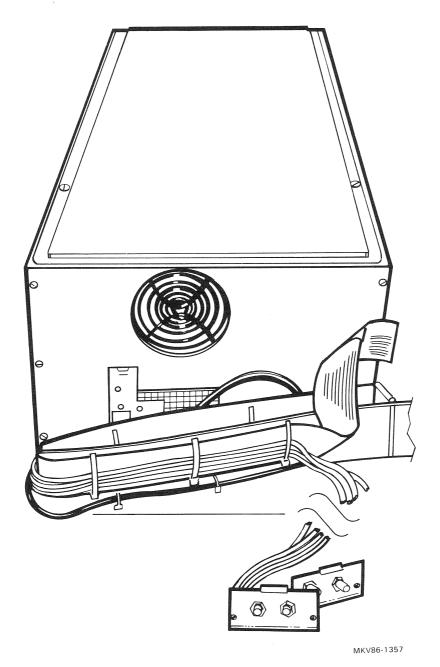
CIPA Mounting Box Differences (Sheet 2 of 2)
